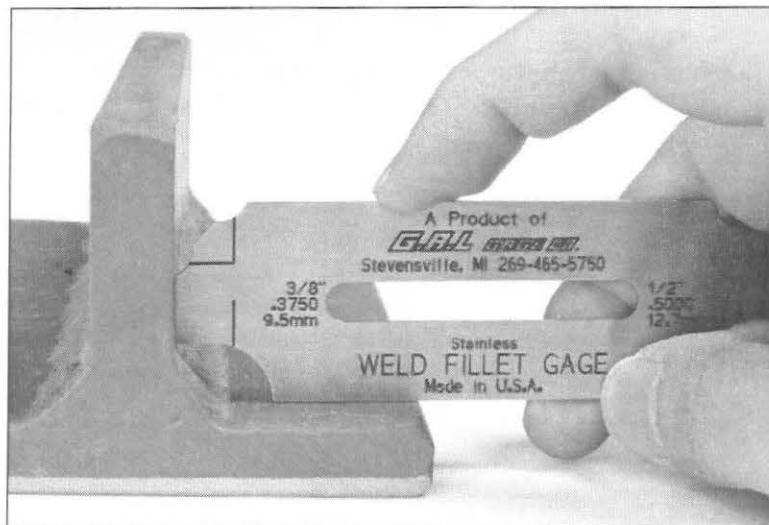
A convex fillet weld gage is used to determine weld size of a convex fillet weld.
